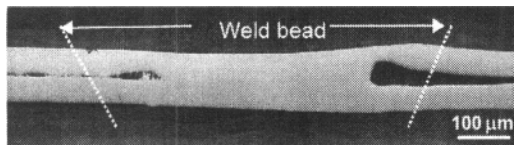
The edge of the welded bead in the sample welded by electron-beam at a beam current of 3.9 mA.
